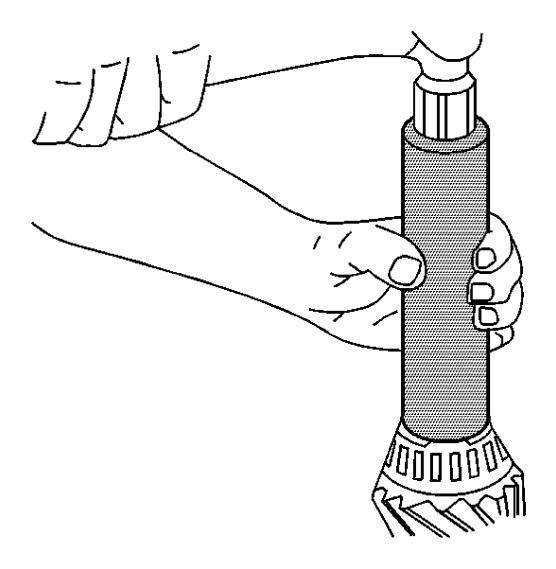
Installing Inner Pinion Bearing Onto Pinion Gear Courtesy of GENERAL MOTORS CORP.
